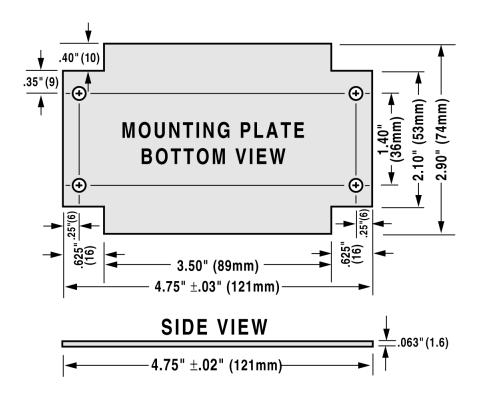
DL-3400 Mounting Plate Dimensions
